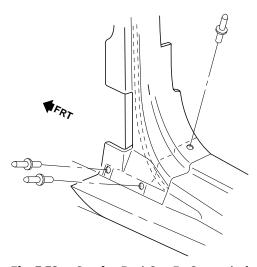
Service Part Can Be Separated at the Bonded and Riveted Joint
